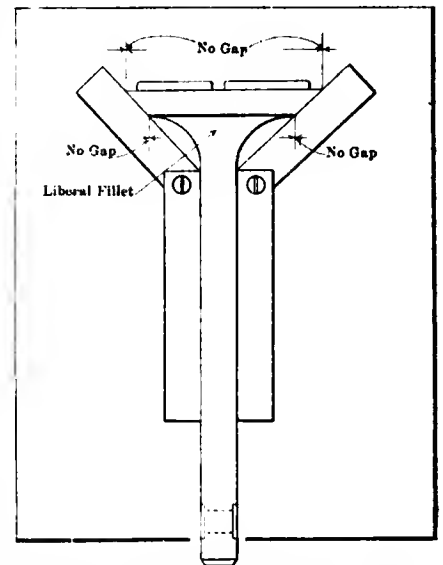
Cone type of valve with a liberal fillet between head and stem which prevents warping with heat changes
